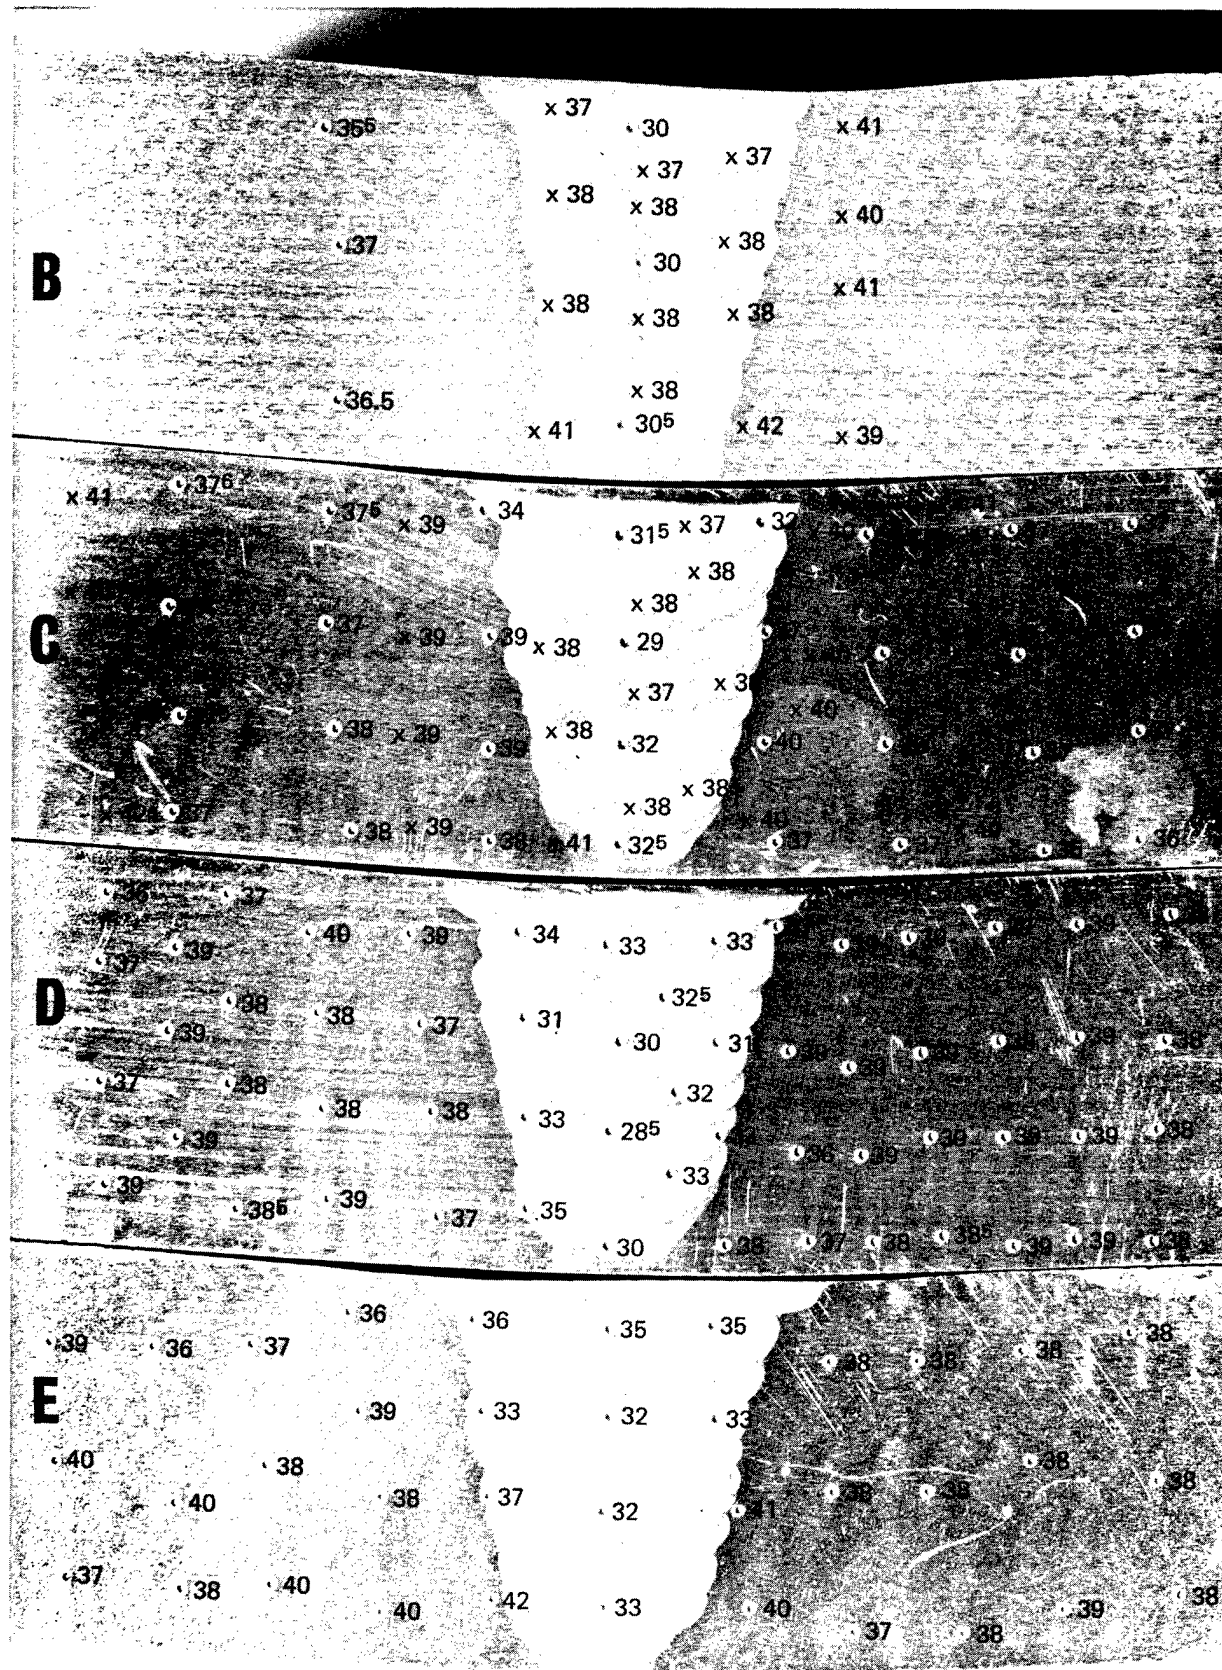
Sections of weldments of the 12Ni — 5Cr — 3Mo maraging steel made using 12Ni — 3Cr — 3Mo filler metal. Sections were maraged after welding at 480°C for 3 hours which resulted in the Rockwell C hardness values shown beside the indentations. After maraging, sections B and C were annealed 1 hour at 815°C, air cooled, and aged at 450°C for 24 hours. The hardnesses achieved by this treatment are shown by the numbers beside the X-marks. (Neg. P67-8-33B)
